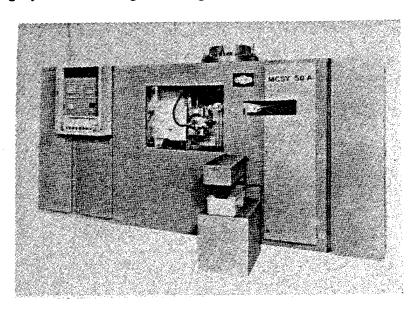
MCSY 50 A multipurpose lathe-type machine tool
